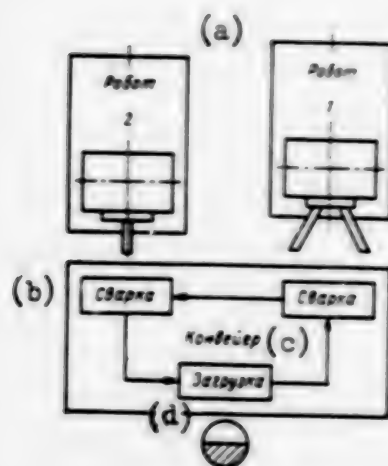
Automatic line for assembly-welding of recess of cover of a tool box
